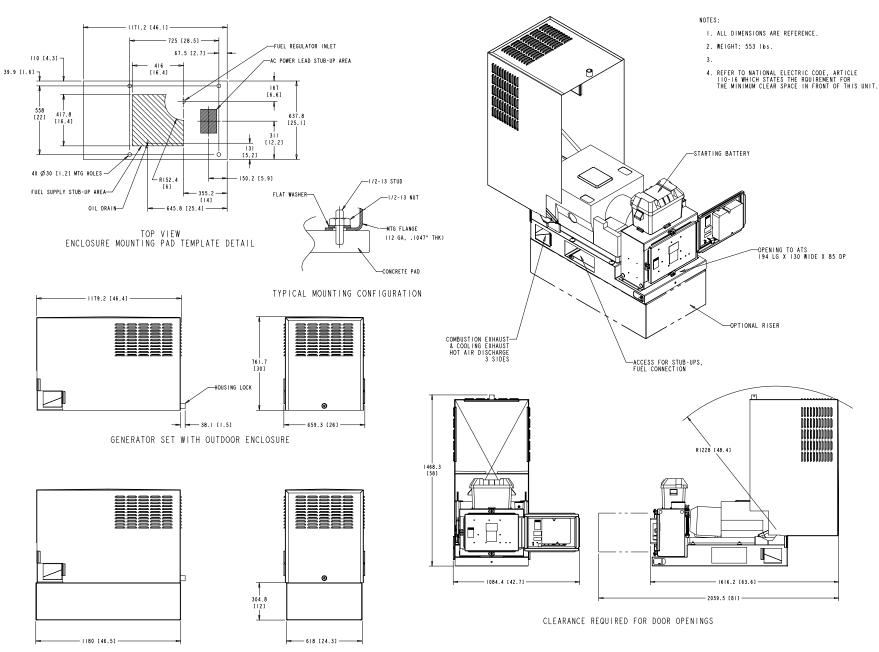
TYPICAL GENSET OUTLINE DRAWING WITH ENCLOSURE
